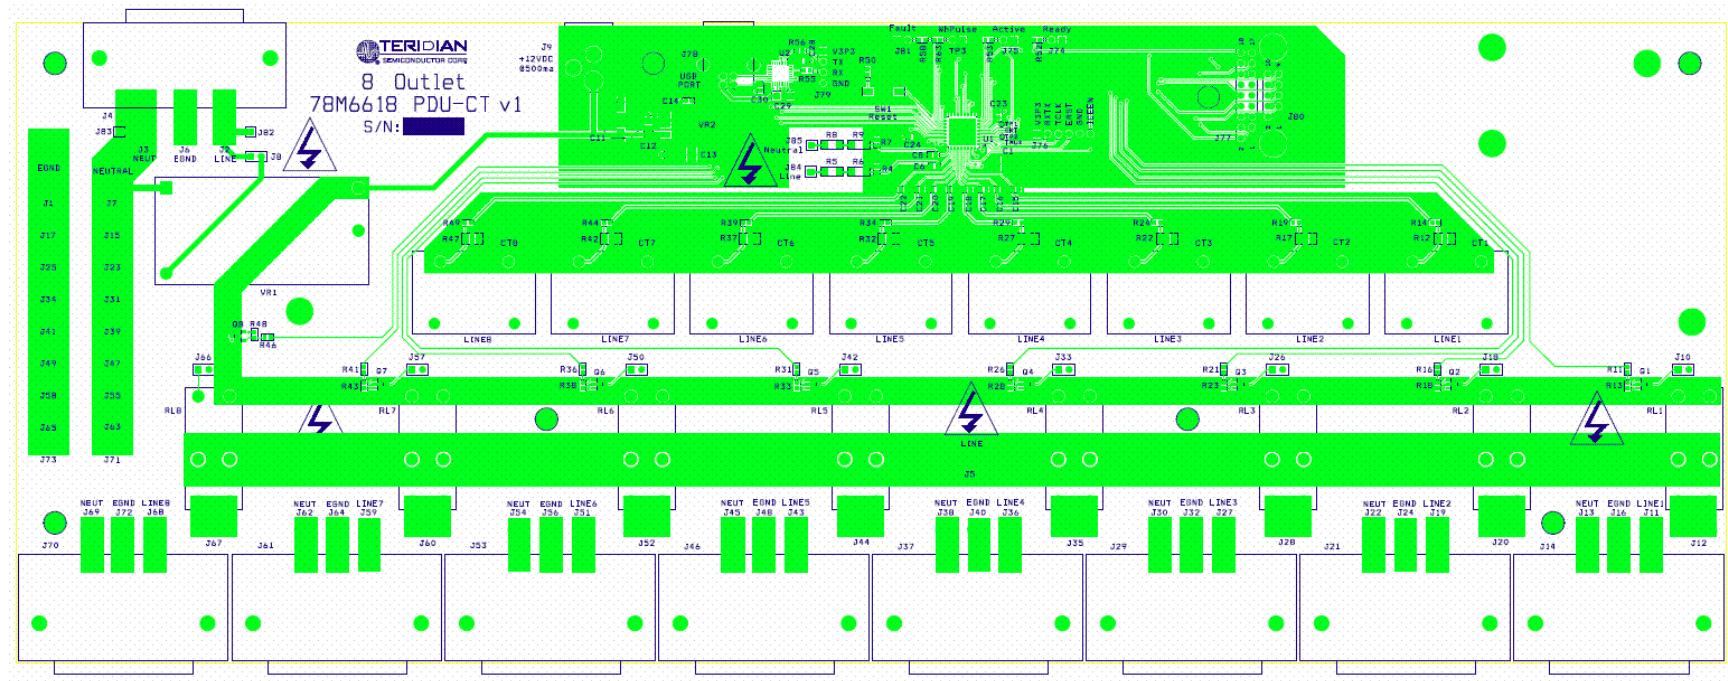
78M6618 PDU-CT Evaluation Board PCB Top View
